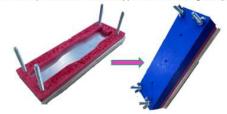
, a) Digital twin of 3D printed casting/compression mold for developing an aeronautical component for the open-source drone frame SourceOne V5 b) the physical twin of 3D printed casting/compression mold for developing an aeronautical component utilizing reused glass fiber material.
